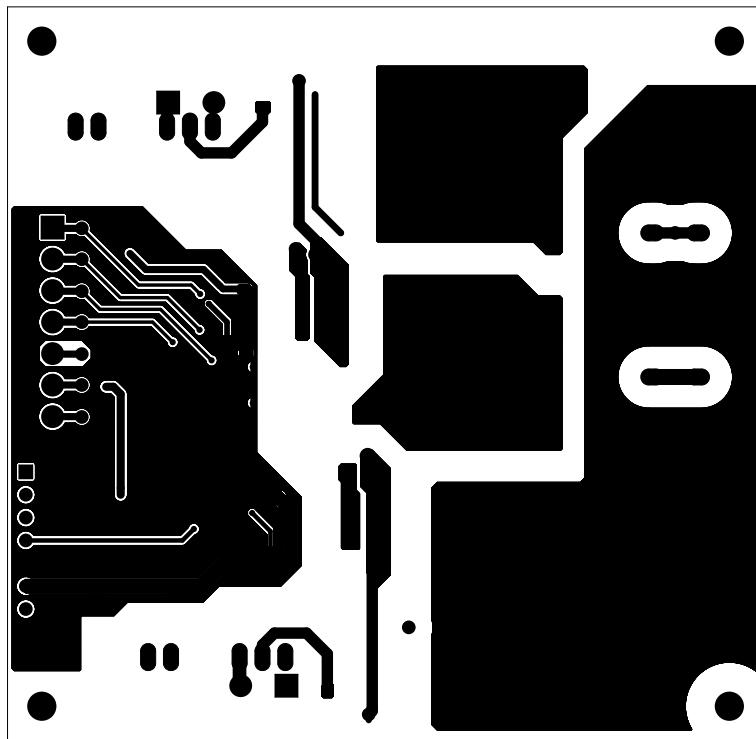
EVSTGAP2SiCSN – Layout (component placement bottom view)
